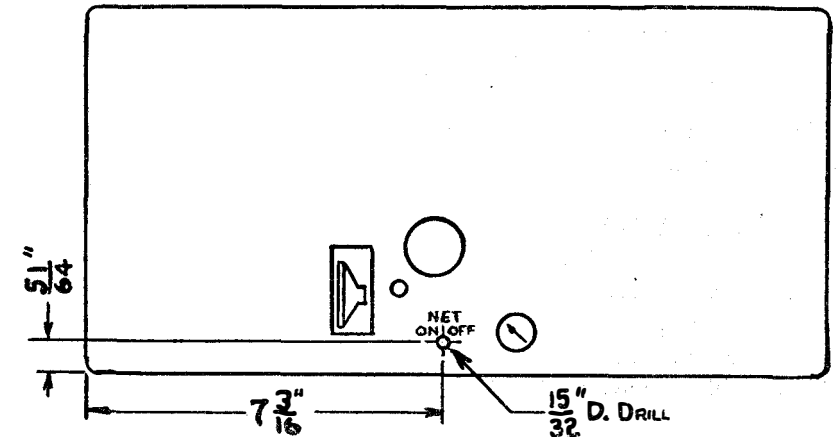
Model TBO and TBX series equipments. Panel layout of "transmitter netting switch" hole.
